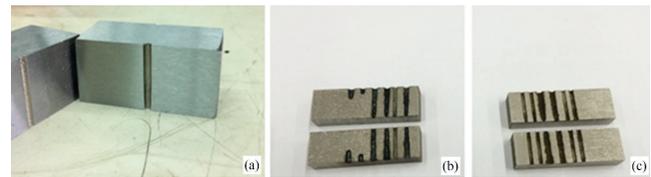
Drilled workpiece halves: a) AISI4140, b) Ti64, c) In718
